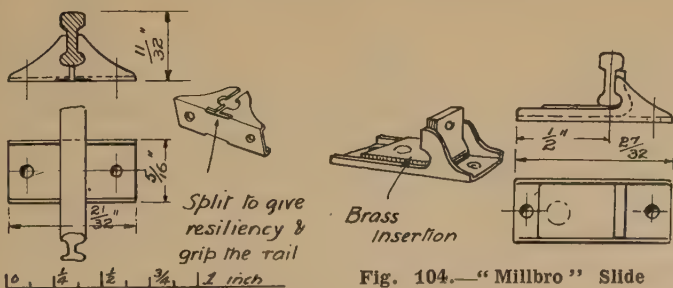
“Millbro” Spring-steel Chair and Solid Rail
